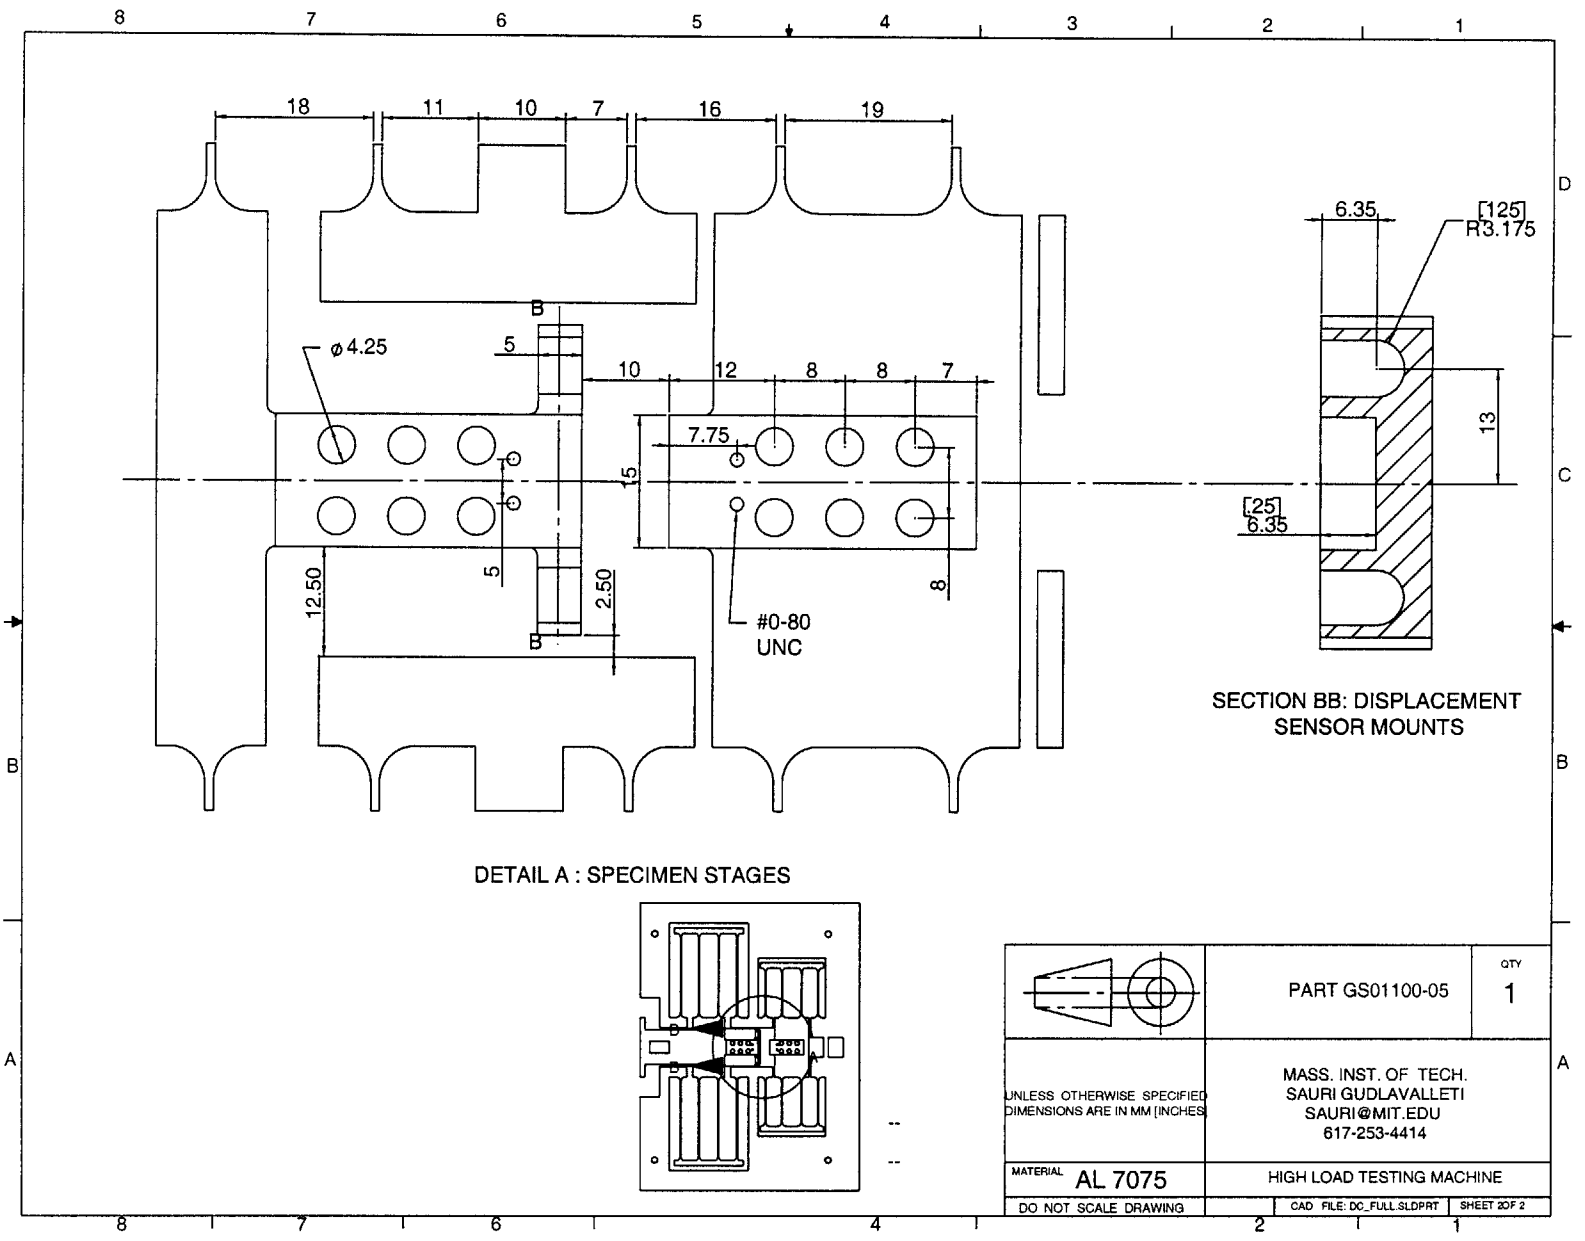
Part GS 1100-05. High load testing machine flexure frame (Sheet 1 of 2)
